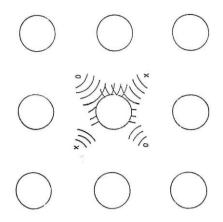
TECHNIQUES FOR EXAMINATION OF FILLET WELDS
